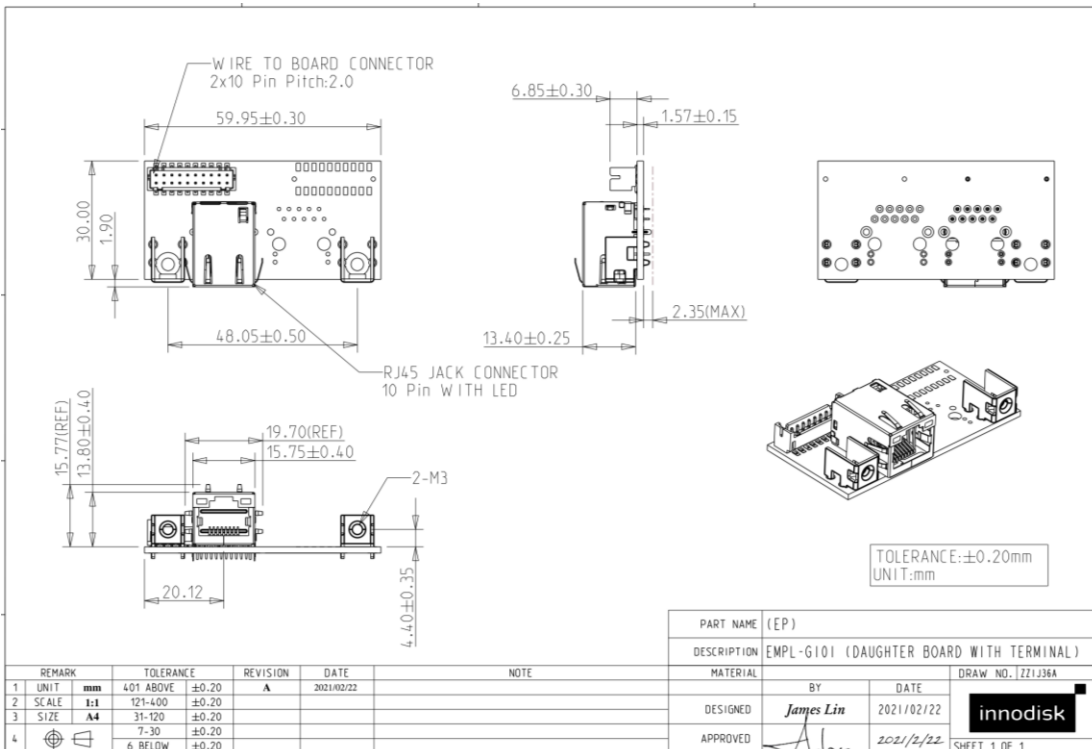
Mounting Hole Daughter Board Drawing (EMPL-G101-C1/W1)
